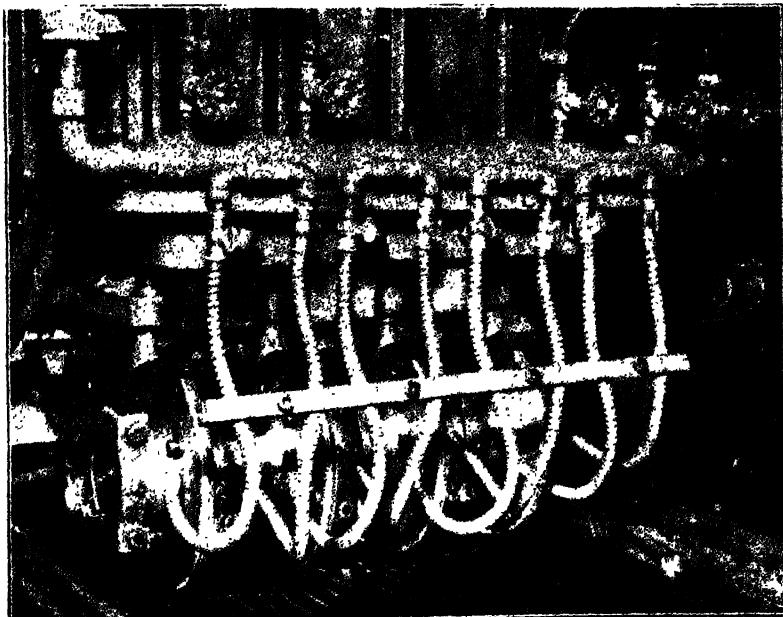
Welding parallel seams in refrigerating-machine condenser plates with welder having four wheels.
